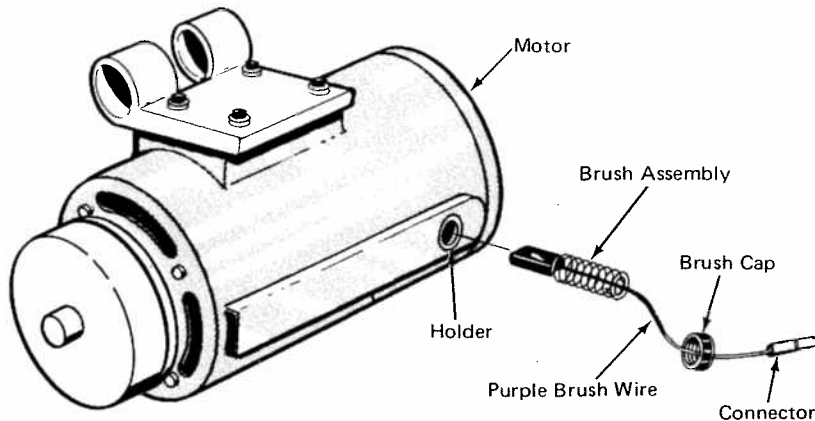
Removing the Wired-Brush Assembly for Replacement
